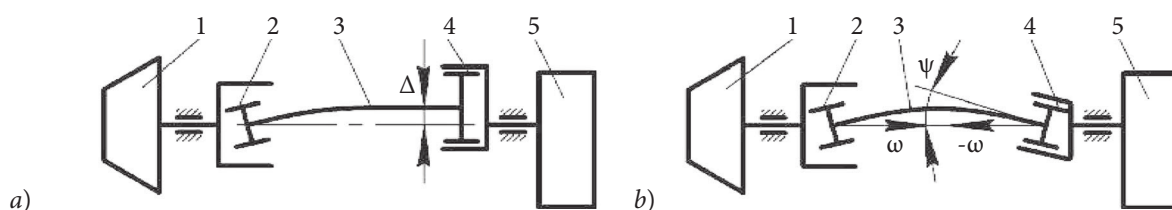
Beating (a) and misalignment (b) of the teeth of the gear clutch: 1 – propeller turbine; 2, 4 – toothed bushings; 3 – shaft; 5 – reducer
